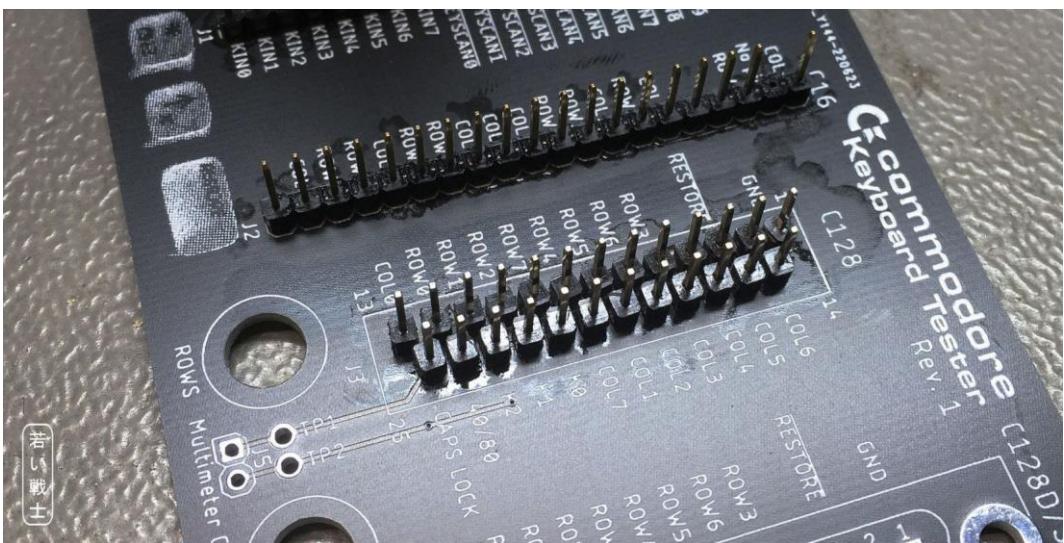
Soldered in C128 keyboard header (25 single pin headers) PCB Rev. 1
